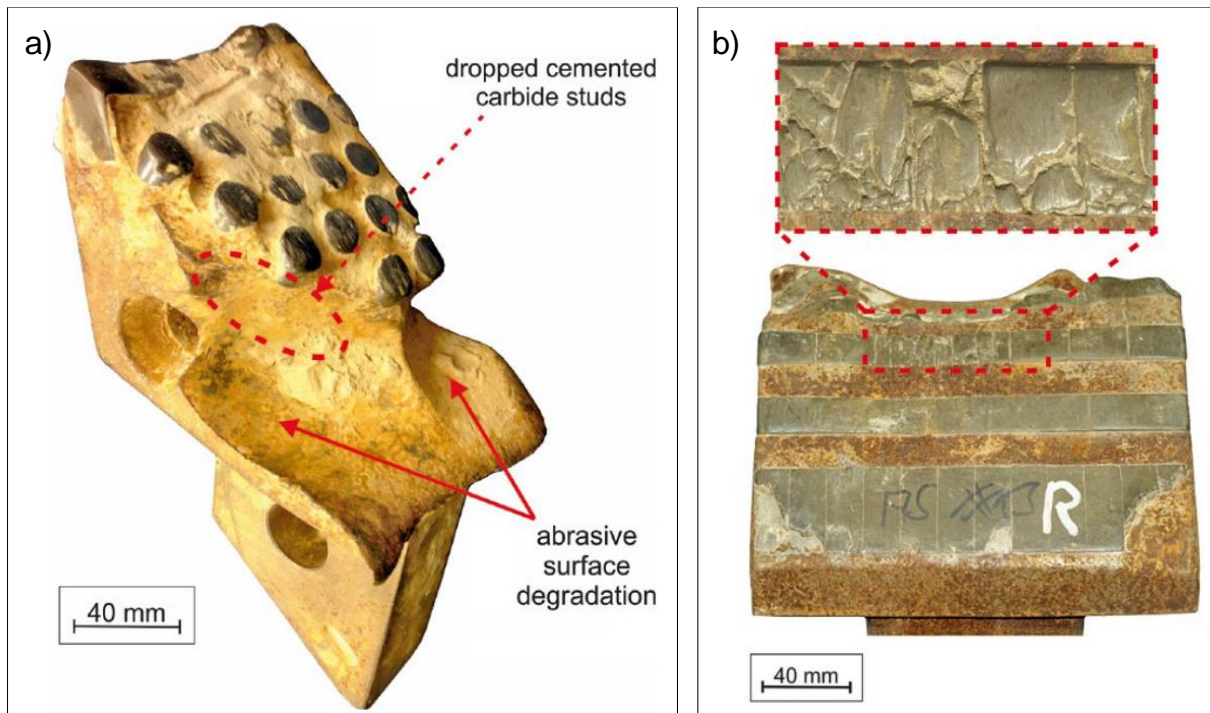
a) Chisel tool with severe abrasive wear damage; the surface degradation leads to dropped studs. b) Damaged surface of a chisel tool due to surface spalling (Küpferle et al. 2018a).
